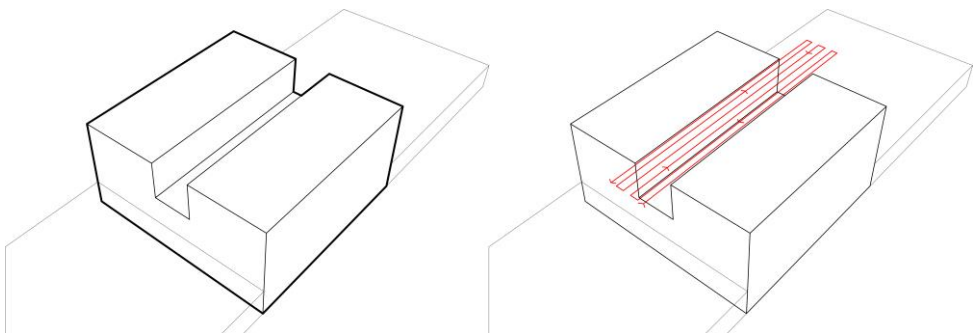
Socket component test setup. Socket area to test + Routine path.
